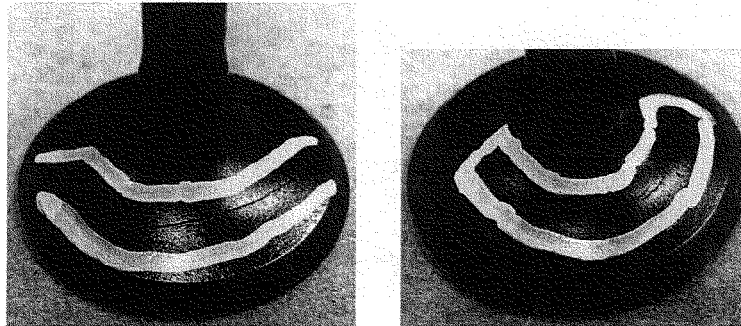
Cracked Valves from E15 Verado 1B812776, Bottom Valve in Cyl. 3 Left, and Top Valve in Cyl. 6 Right
